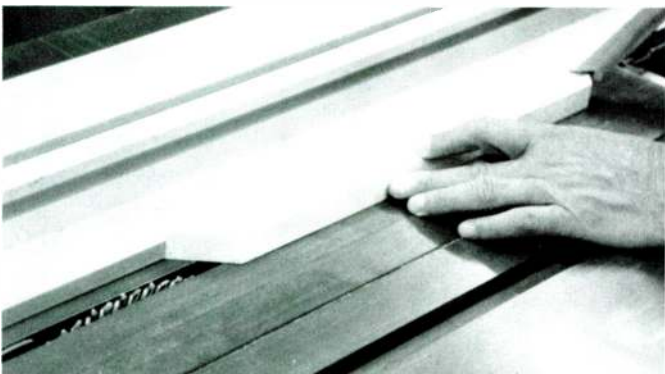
Cutting the groove for the inlay strip on a side of the grille frame. This should be done before you assemble the frame.
